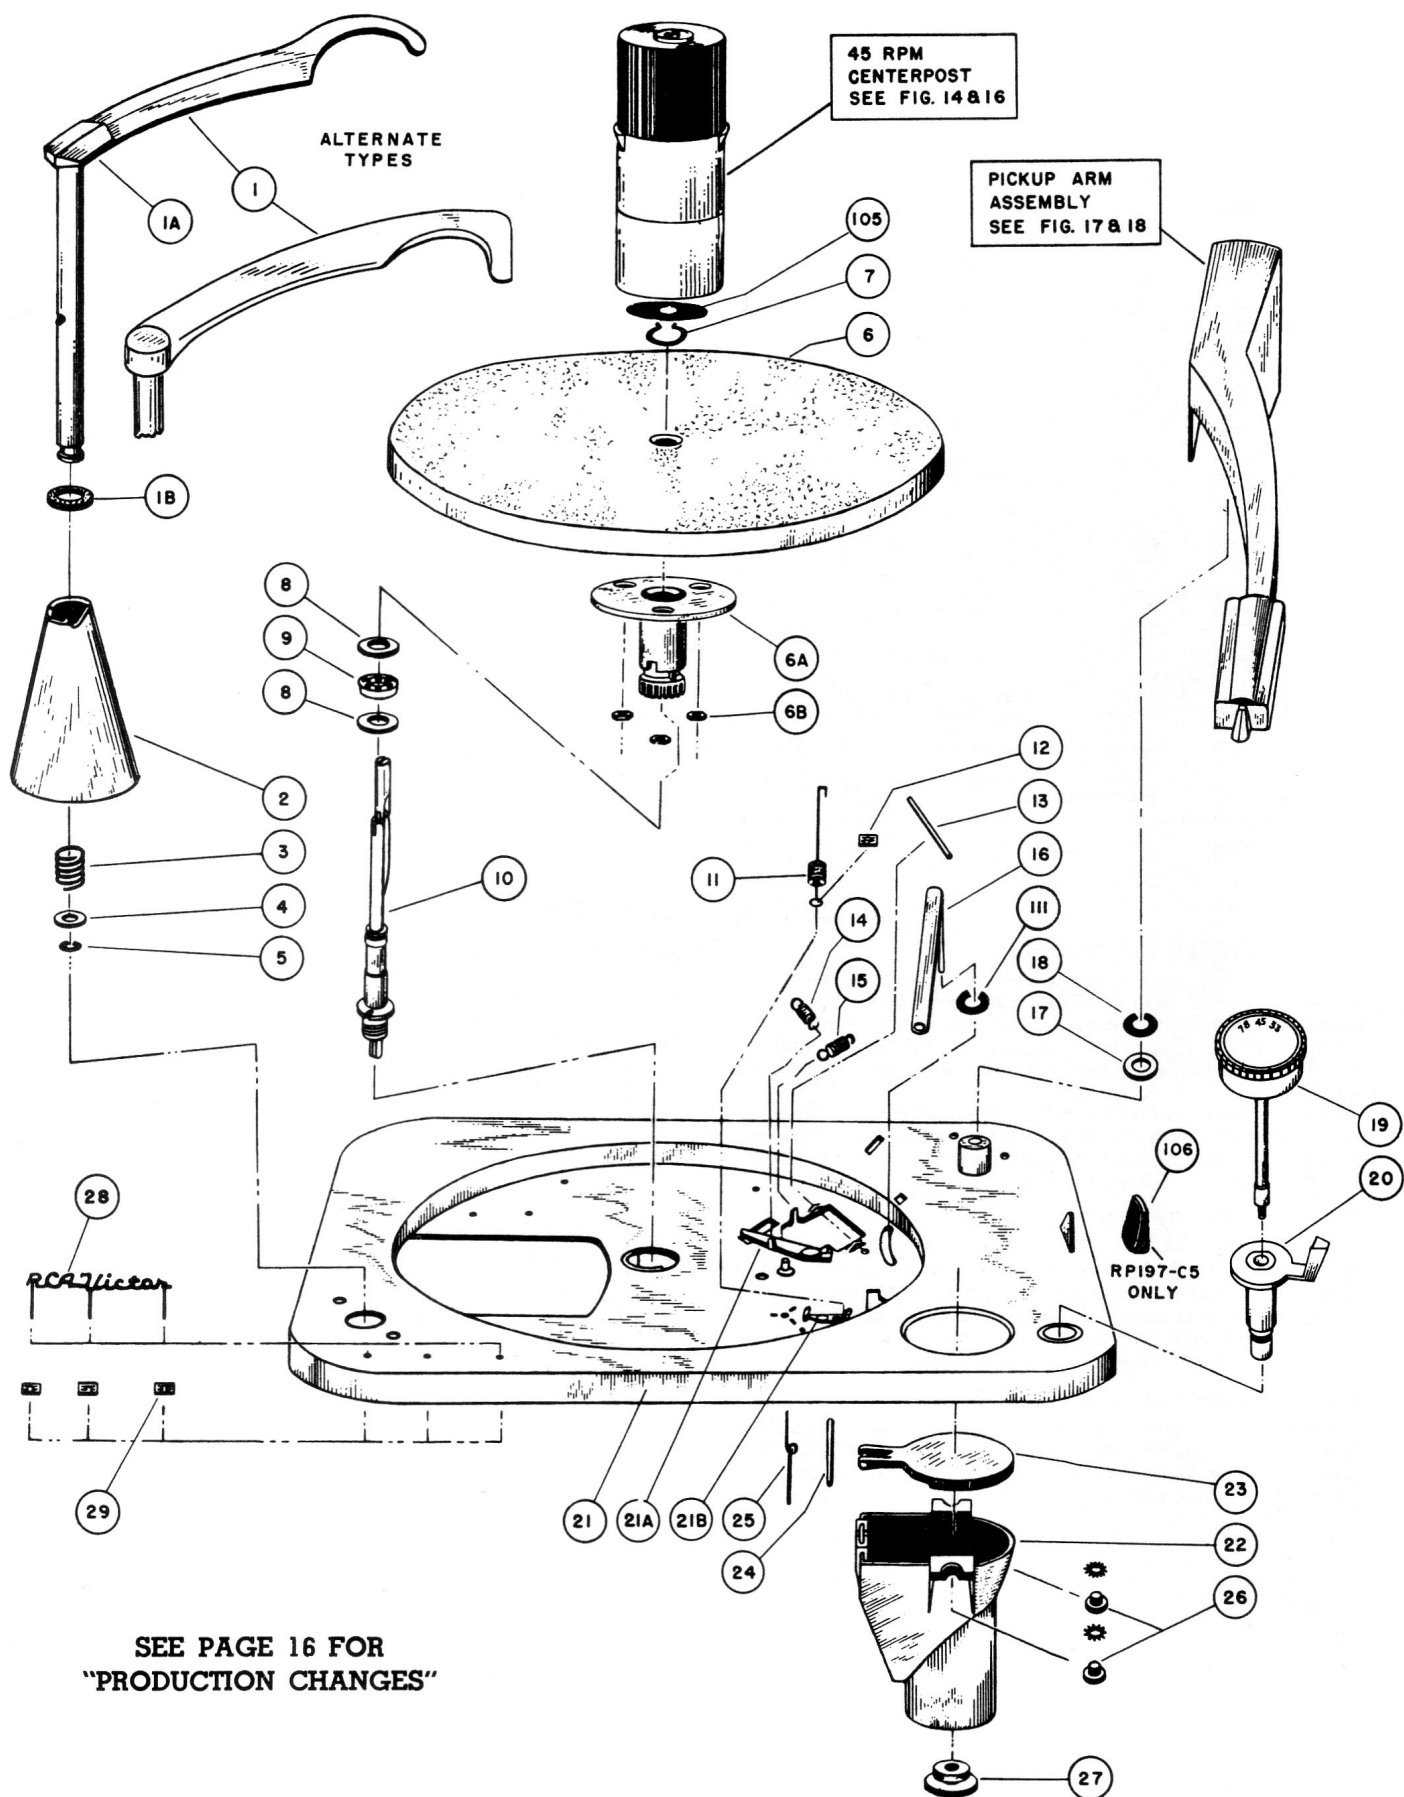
A—Exploded View Showing Mechanism Parts Above Motor Board
